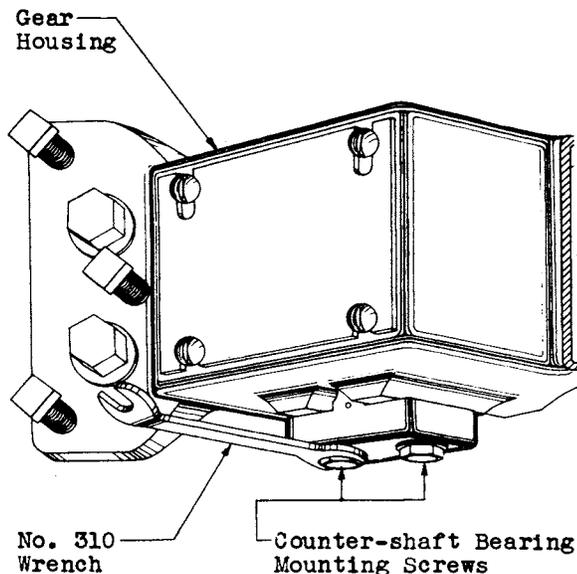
Adjustment of Counter-Shaft Bracket to Obtain Minimum Back-lash Between Gears on 161 Type Interrupters
